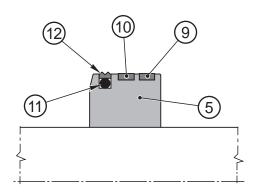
Before attempting to disassemble the unit, drain the oil in the cylinder chambers completely.
